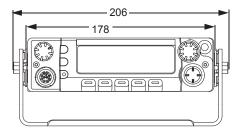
Front View of O3 Control Head with Coiled Cable
